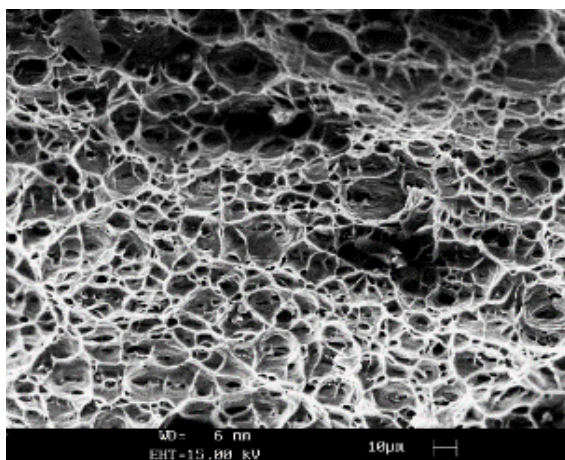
(c) Fracture surface in TIG tensile tested specimen
